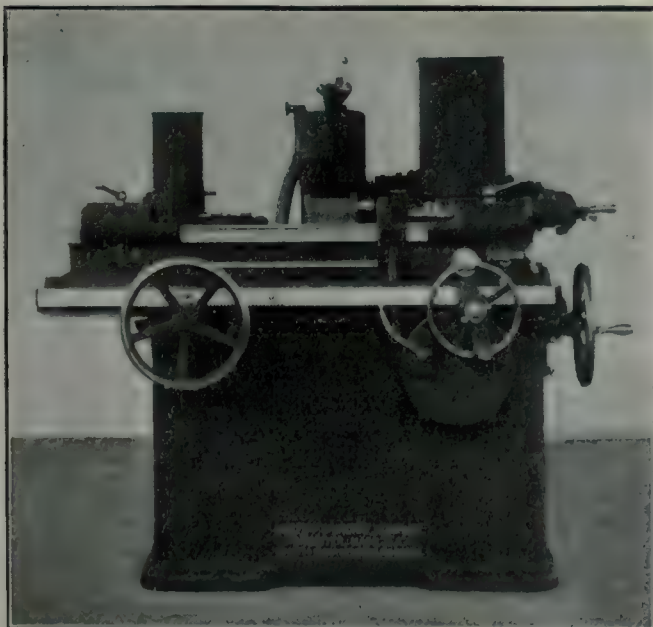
FRONT VIEW, NORTON 10 IN. X 24 IN. SPECIAL PURPOSE MACHINE.
